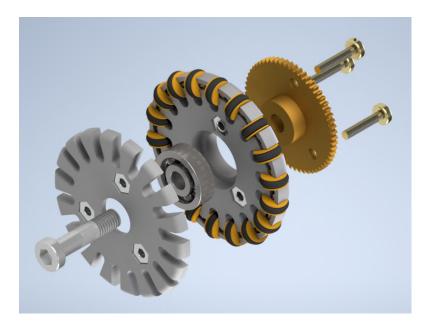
Exploded view of our new omnidirectional wheel assembly.
